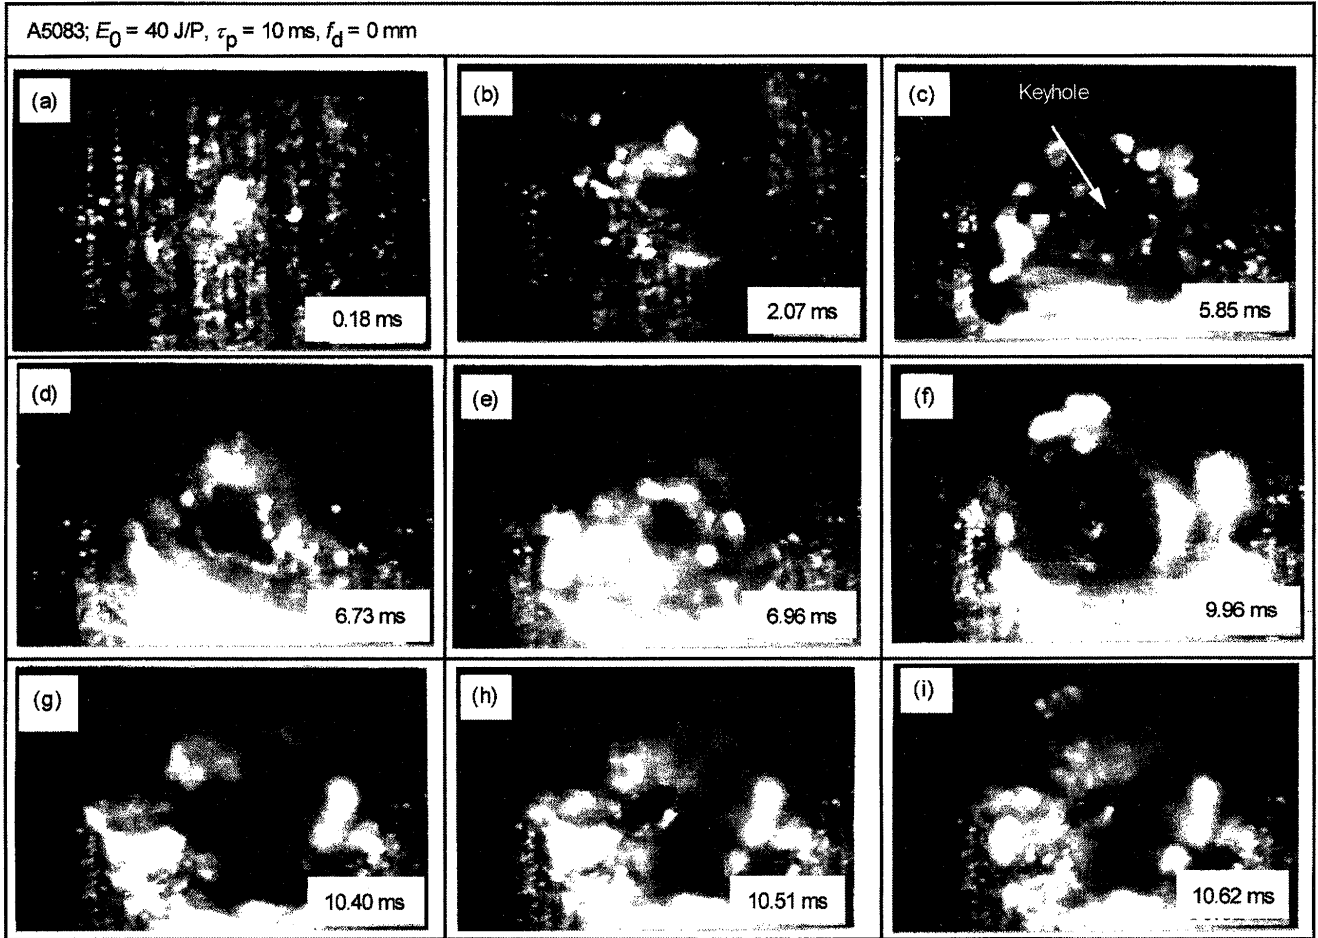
Dynamic behaviours of keyhole opening in pulsed YAG laser spot welding with rectangular pulse shape
